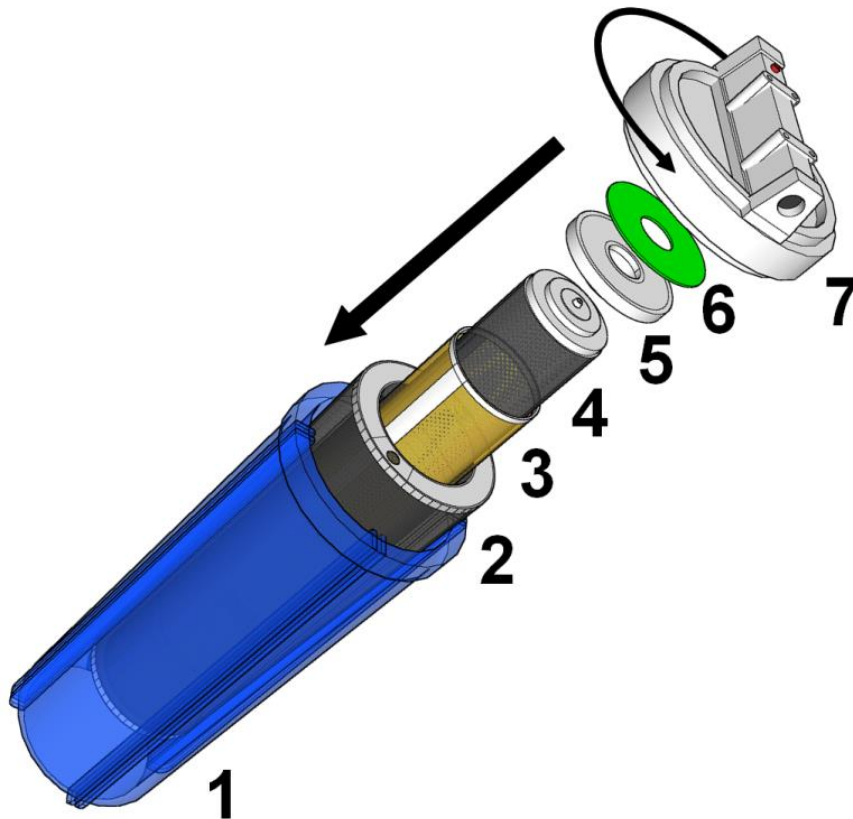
Schematic of the MFC components assembling (1) filter housing; (2) external stainless steel grid; (3) PEM fixed to the PVC support; (4) internal stainless steel grid; (5) PEM support cover; (6) silicone sheet for sealing; and (7) filter housing cover
